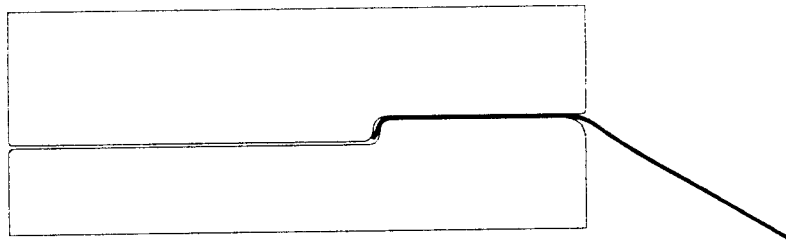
Drawn phenomena of specimen when drawing angle = 0°
